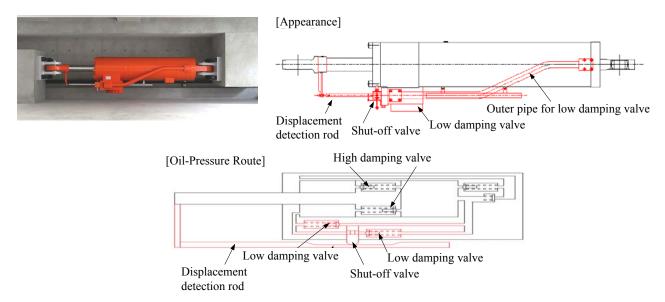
Appearance and Oil-Pressure Route of Passive-Switching Oil Damper
